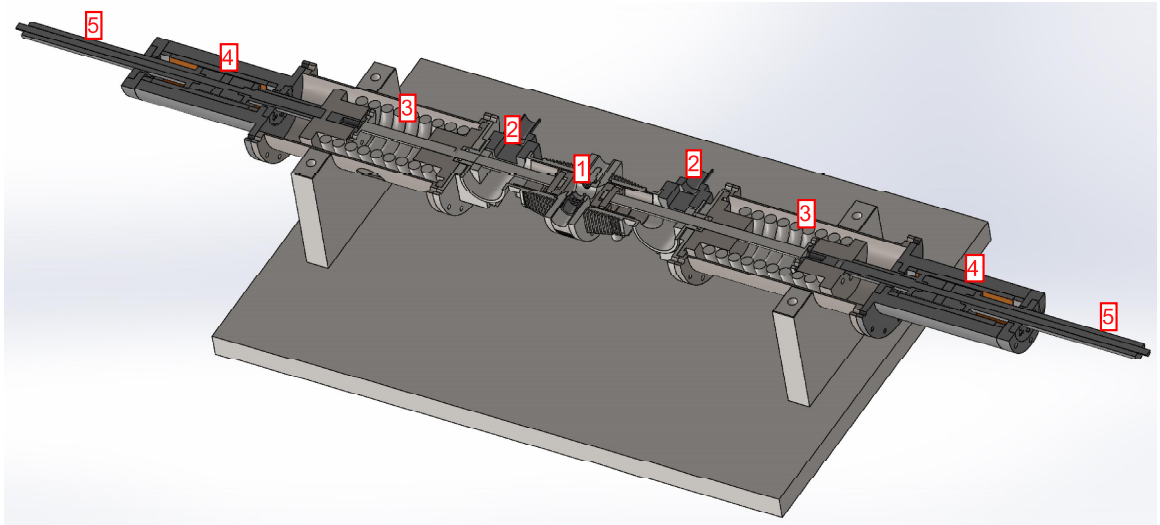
Sectioned view CAD render of test FPE generator. 1—Combustion chamber (cylinder), 2—Scavenge case, 3—Spring, 4—Electric machine, and 5—Translator rod.
